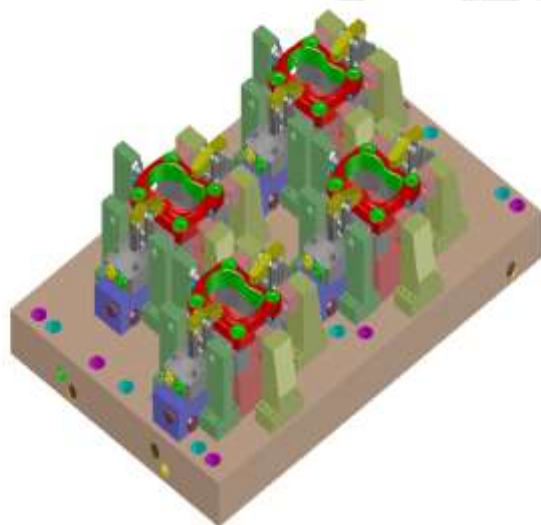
3D view of 8-cylinder hydraulic fixture.
